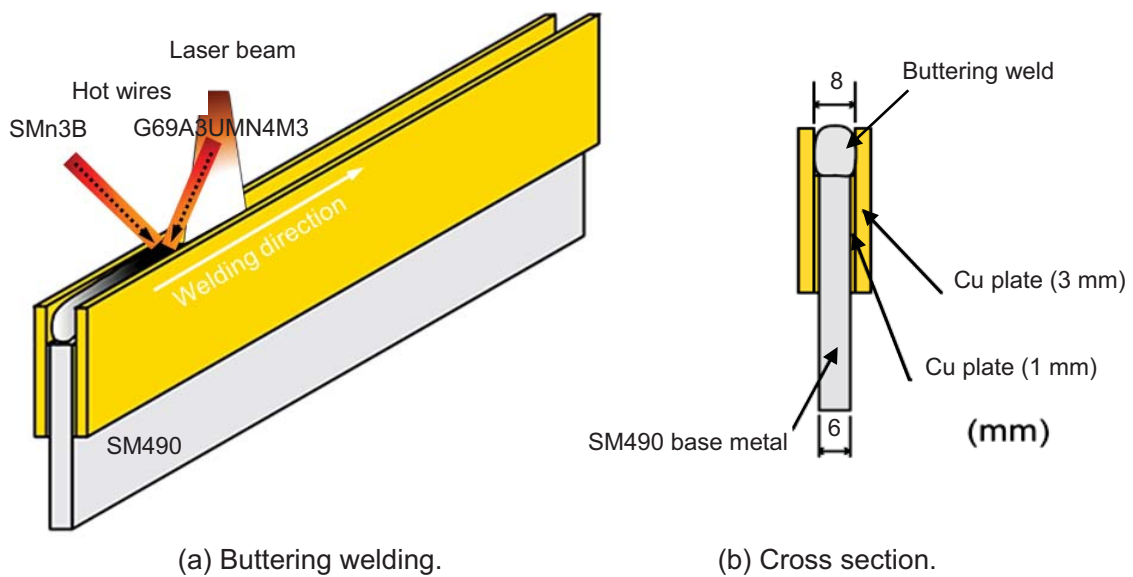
Schematic illustrations of buttering welding with two hot-wires.
